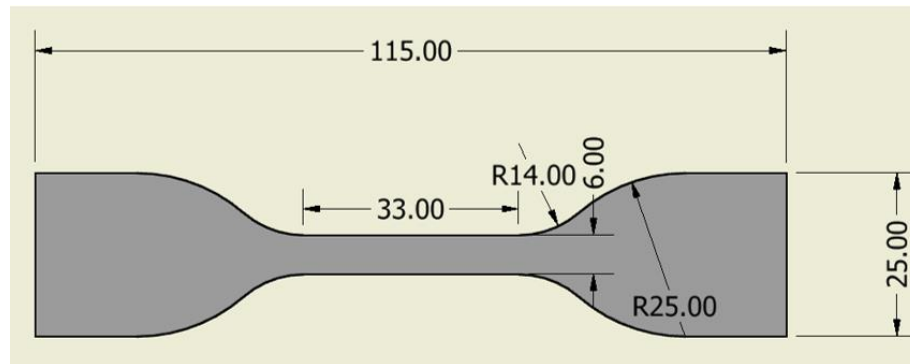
Dimensions of uniaxial tensile test dumbbell-shaped specimen (all units in mm) [26].
